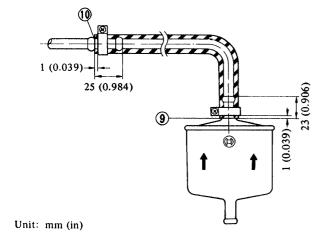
Fuel filter outlet to fuel pipe A rubber hose
